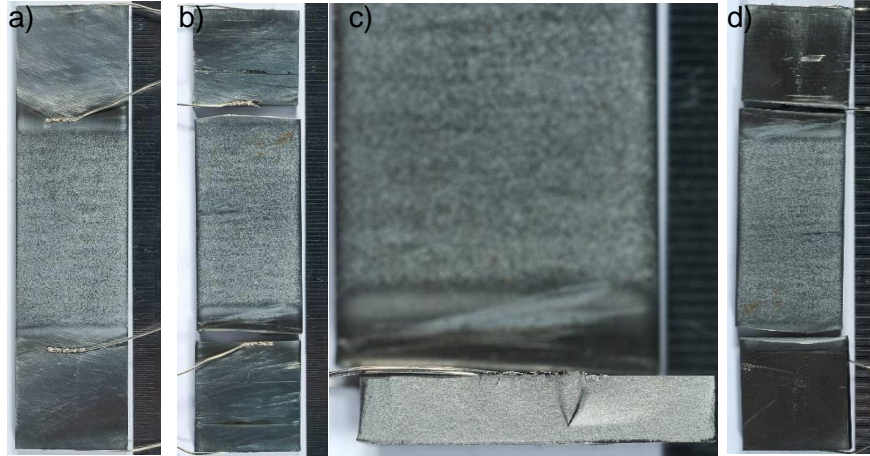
Mo coated sample before and after testing in air. The cracks initiated from the welding spots out of the coated region. a) As-cleaned and welded Mo-coated sample; b) Top surface under compression; c) Fracture surface with the effects of welds; d) Bottom surface under tension.
